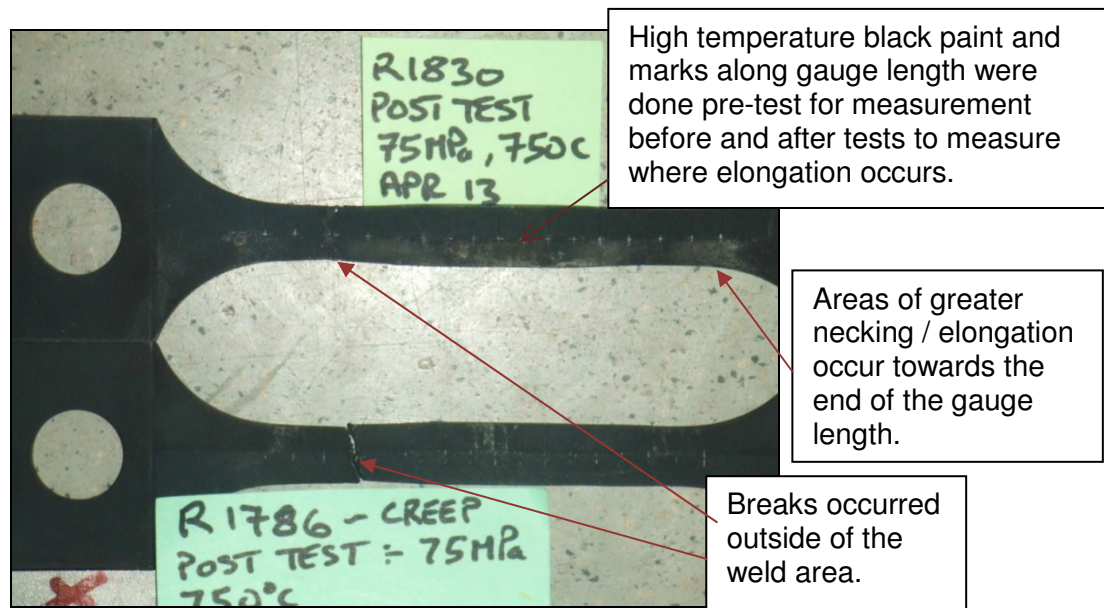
Two 750 °C failed tests on weldment Alloy800H (750 °C, 75MPa – Batch 1 & Batch 2)
